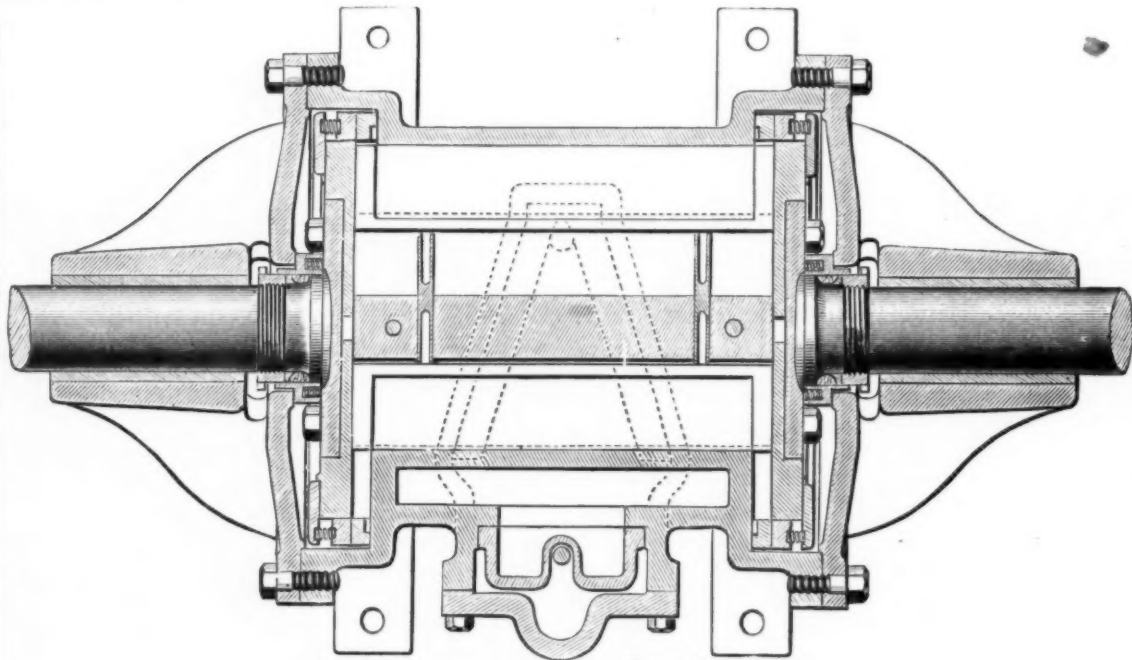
HORIZONTAL SECTION OF REVERSIBLE ENGINE.
